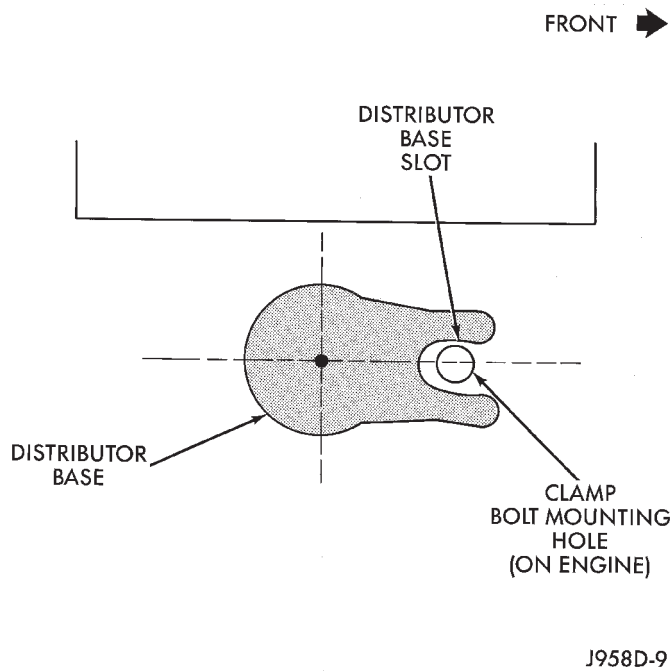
Distributor Engaged Position—2.5L 4-Cylinder Engine
